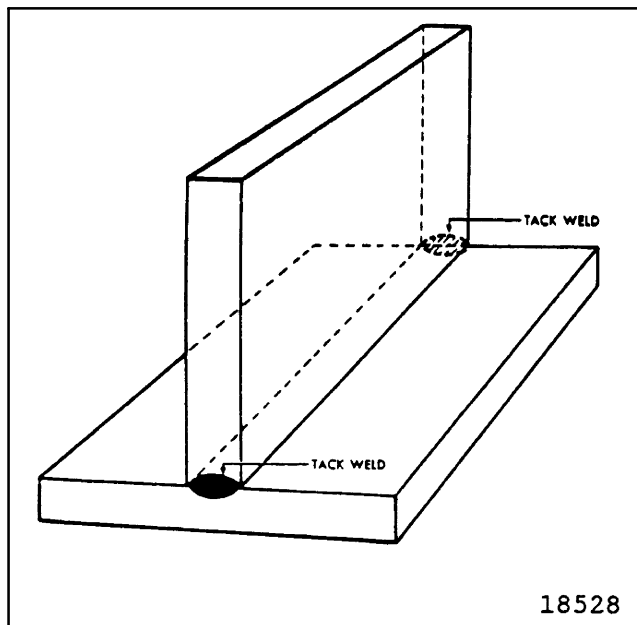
Tack Weld to Hold Tee Joint Elements in Place
